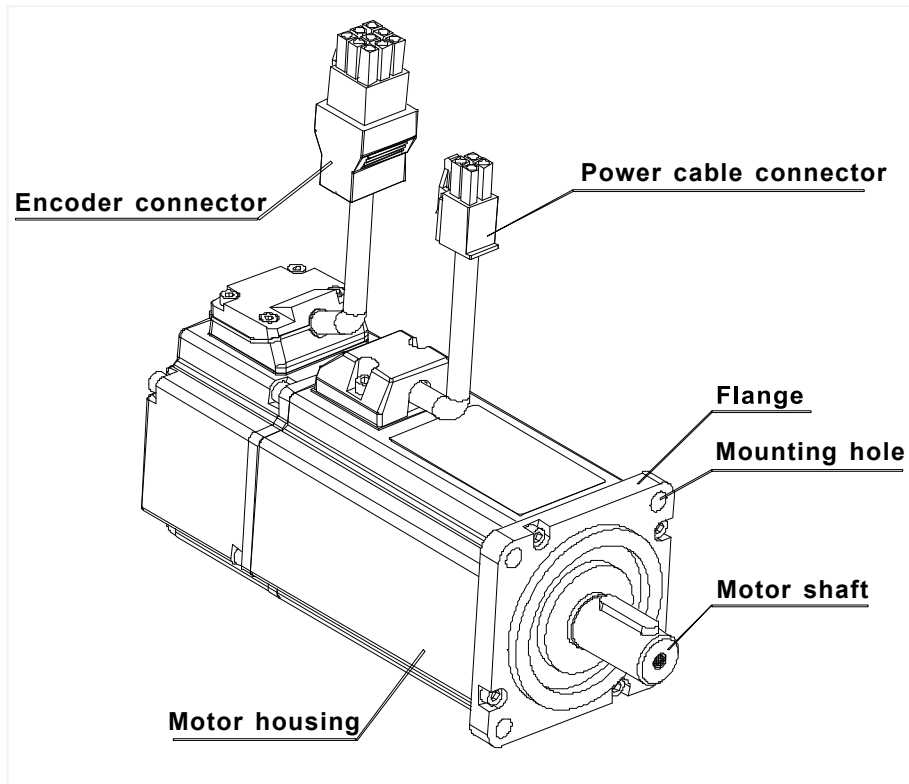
Motor (Wire type) composition of 40/60/80 flange
